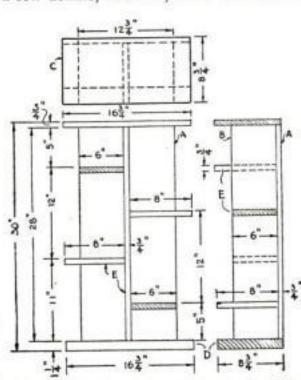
Dimensioned views of the stand, which is a good companion piece for the lounging chair.
